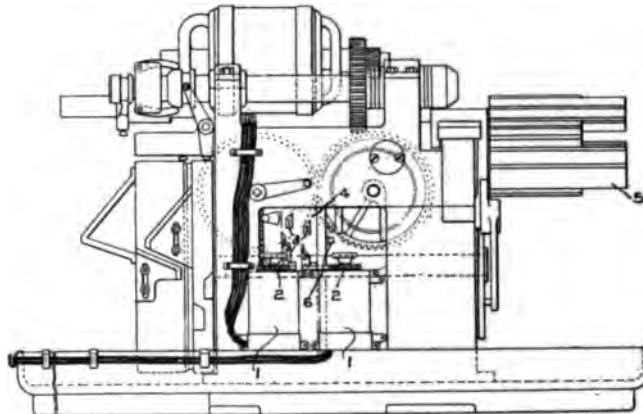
MOTOR-DRIVEN TURRET LATHE OF THE GRIDLEY TYPE MADE BY THE WINDSOR MACHINE CO.
